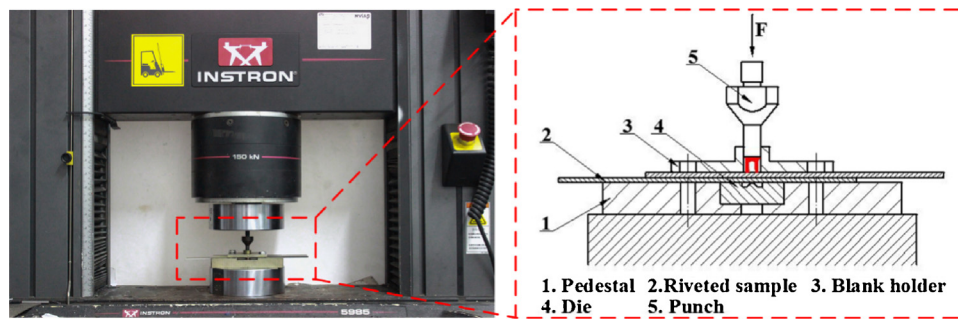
The P-SPR process experiments and diagram using 5985 universal testing machine.
